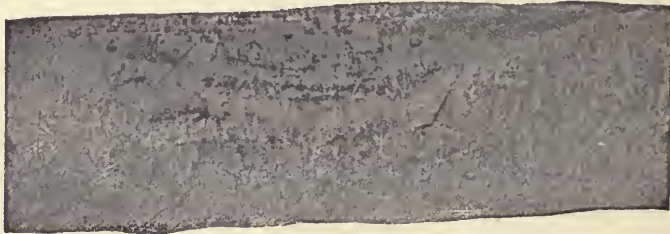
Interposition of oxide and burning of the metal in a weld of mild steel (photograph after corrosion test).
